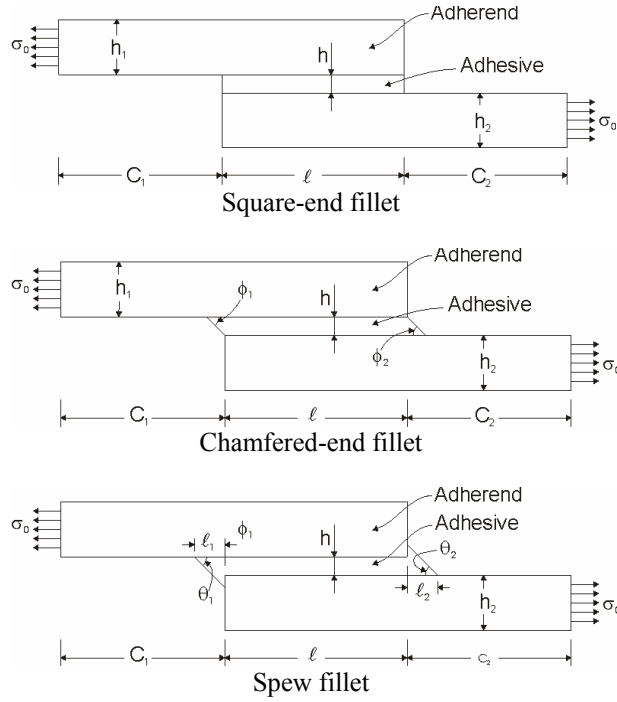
Typical lap joint configurations: square-end fillet ; chamfered-end fillet ; spew fillet.
